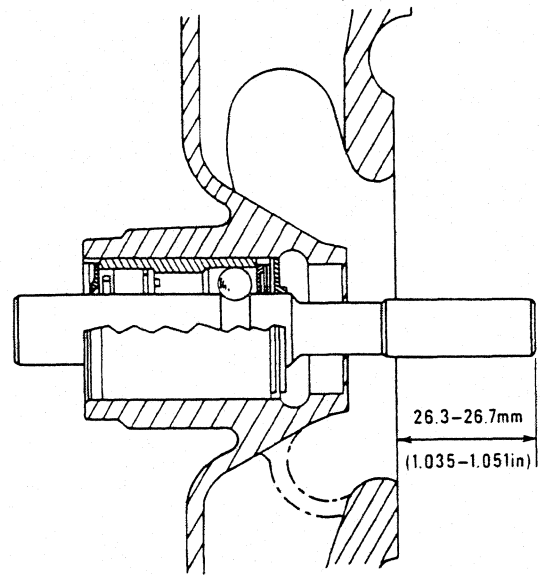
WATER PUMP SHAFT T-82327 PROTRUSION
